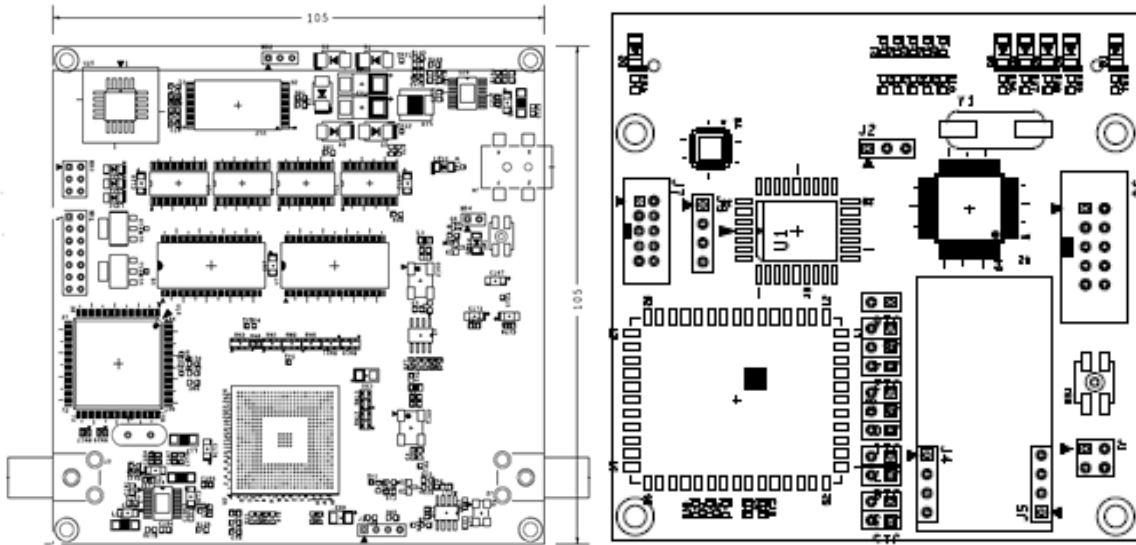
PCB layout of H.263 encoder board and TX WIFI module
